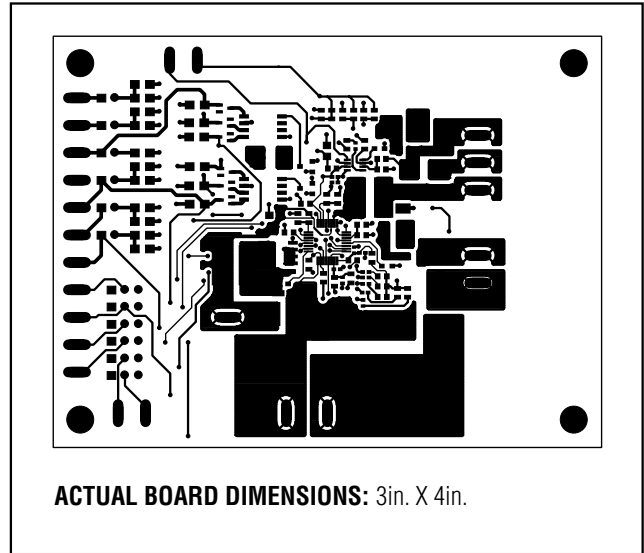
MAX1802 EV Kit PC Board Layout—Component Side
